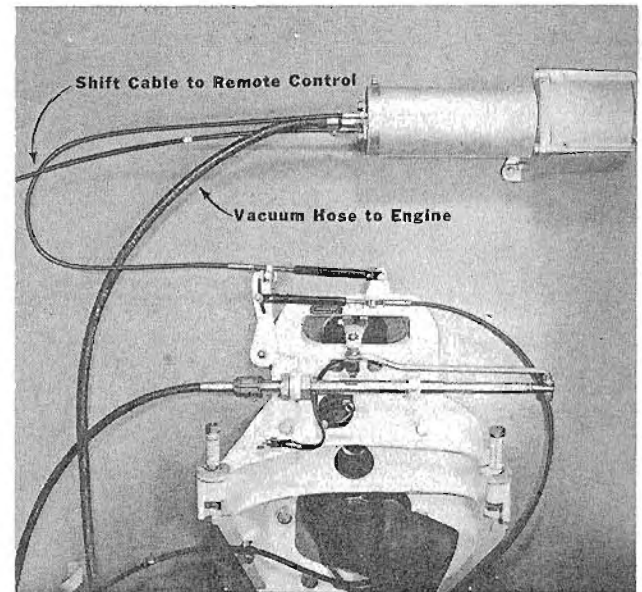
Power Shift Cylinder Mounted over Transom Plate
